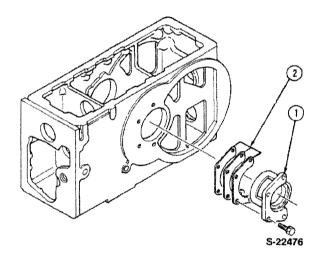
Differential Assembly Removal (Model 1320/1520 Shown)
